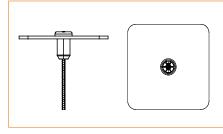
Plate Thickness: 8 mm Top Termination (TL-800): 48 mm Head Diameter 12 mm Head Thickness Wire Rope Tendon: Diameter: 8 mm
